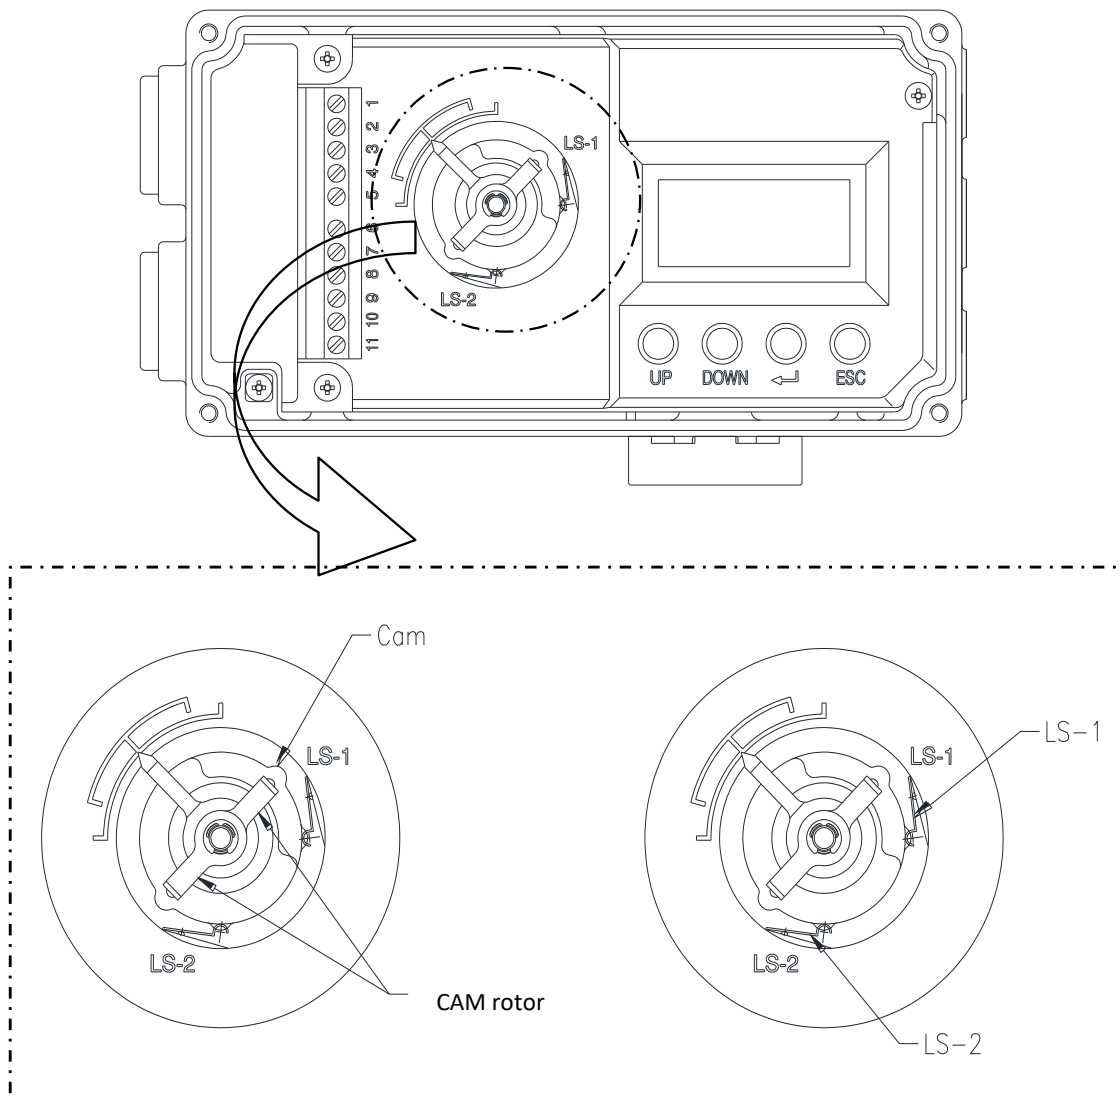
Adjusting the operation location of a mechanical limit switch
